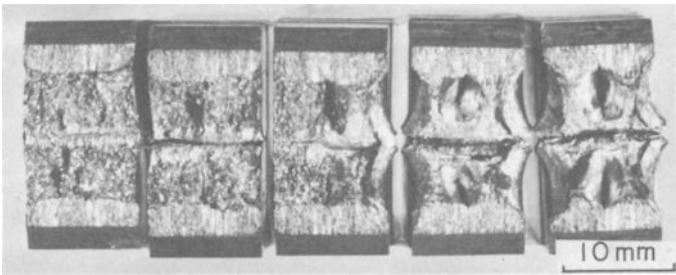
Example of particular fracture surface of the specimen which was solution-treated, fatigue cracked, and tested at the transition temperature range (26Cr-1Mo). The particular fracture surface is on the specimen in the center.
